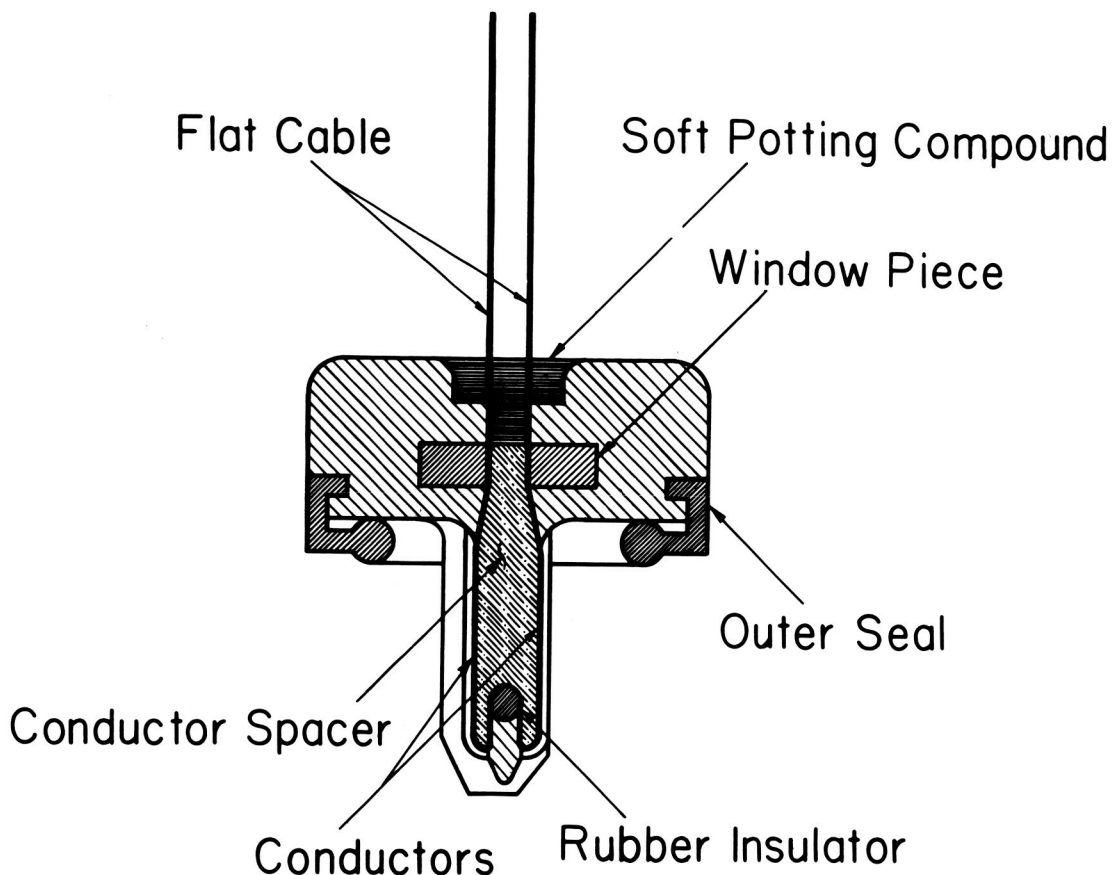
PLUG FOR SINGLE OR TWIN FLAT CONDUCTOR CABLE
